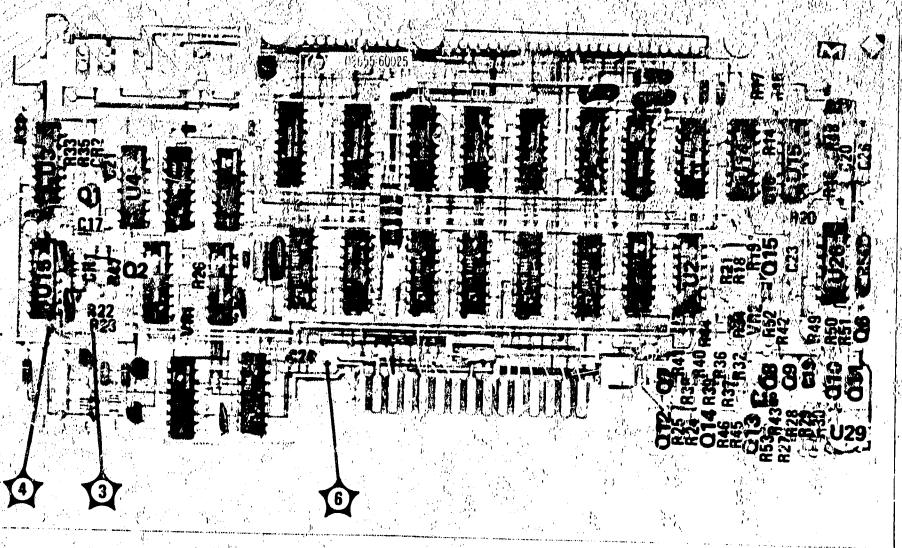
P/O A1A2A1 Counter/Lock Board Assembly (Phase Lock Circuit) Component Locations (P/O Change 6)
